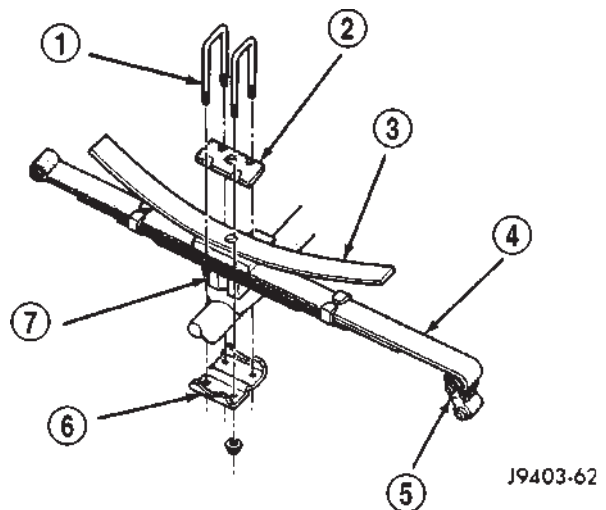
Rear Spring - Cab-Chassis 11000 GVW
